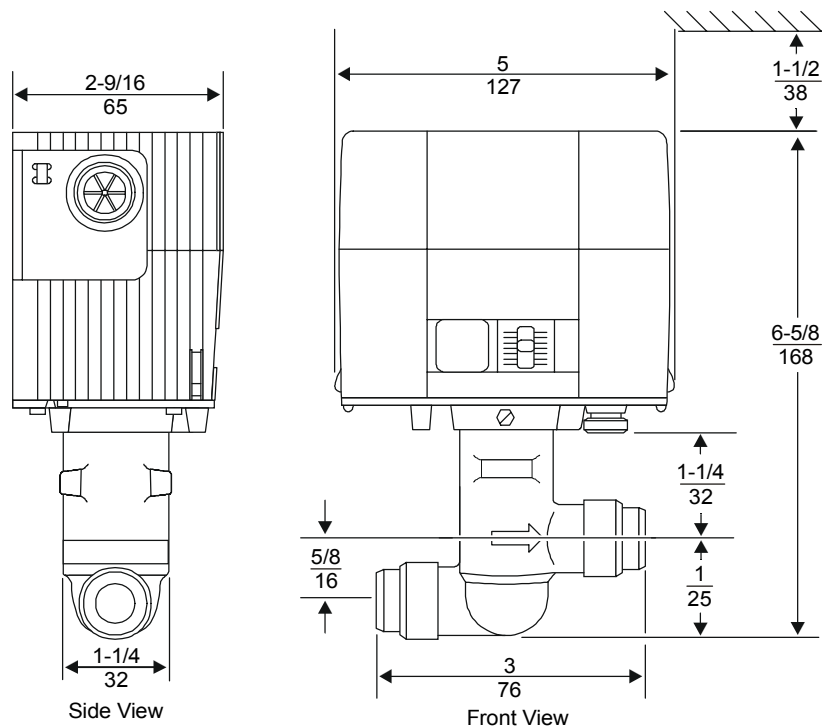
AV-8020 Two-Way PDTC Valve Dimensions, in. (mm)
